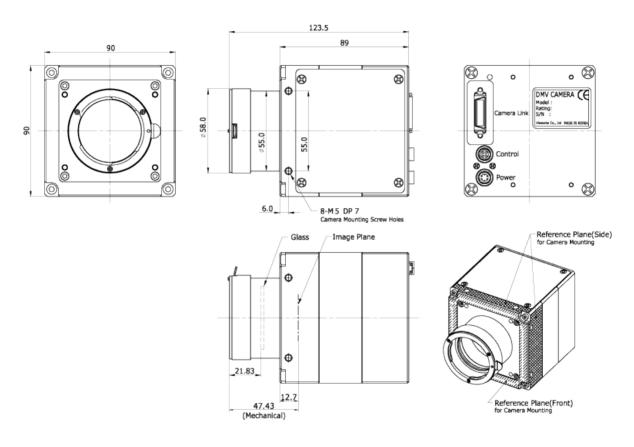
VN Camera Mechanical Dimension (F-Mount)
